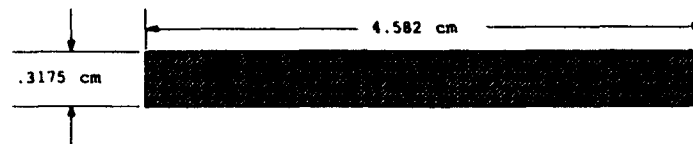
Cross sectional view of the box beams used to model the main integrated truss.
